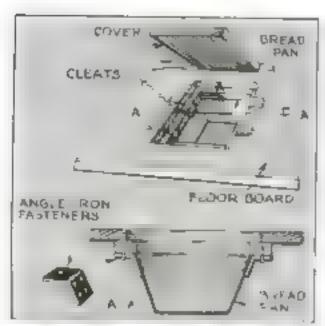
How to construct an ingunious and simple foor board tool box from an ordinary bread pan.
